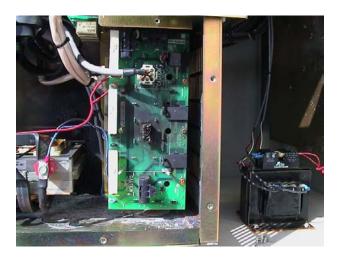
Photograph showing damaged EMI filter board in power electronics module of ORNL's microturbine.
